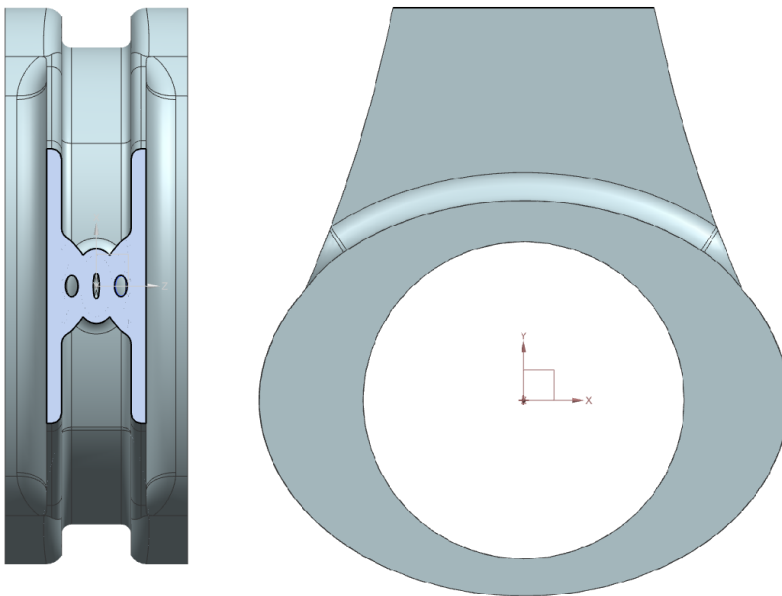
Cross-section of 2.1 beam; lower middle beam section.
